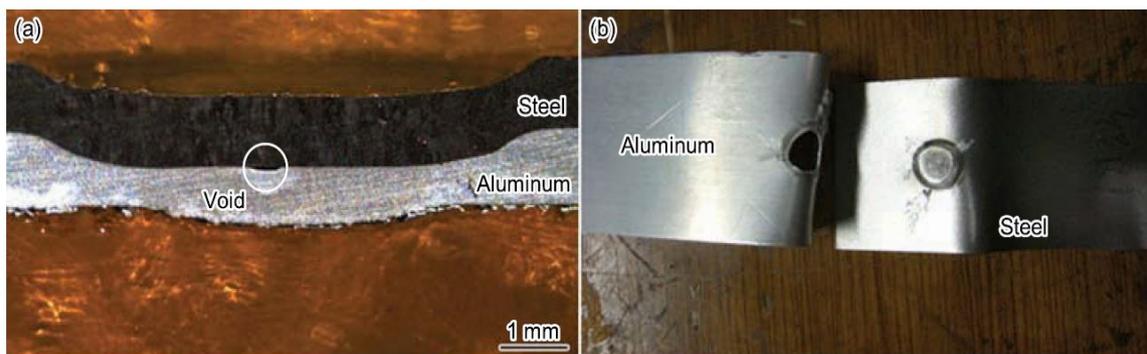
resistance spot welding specimen (a) formation of the IMC layers and voids (b) button fracture of aluminum [27]
